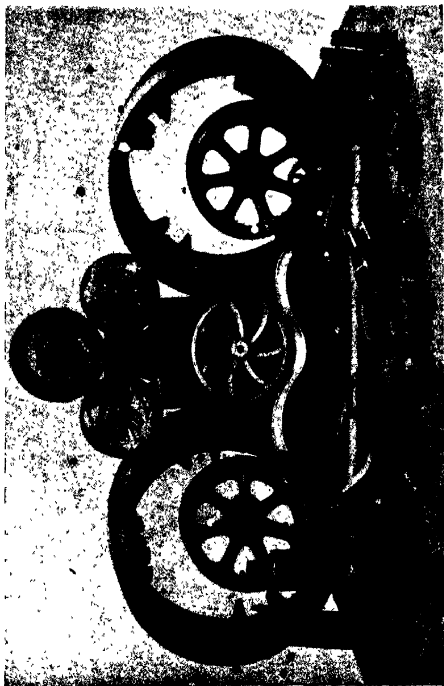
EARLY MANGANESE STEEL CASTINGS AND FORGINGS
